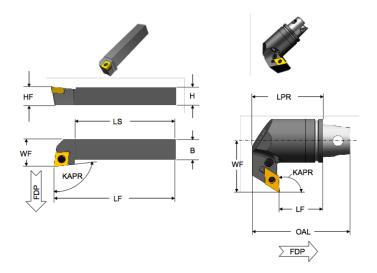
Cutting Tool Measurement Diagram 2 (Cutting Tool, Cutting Item, and Assembly Item – ISO 13399)
